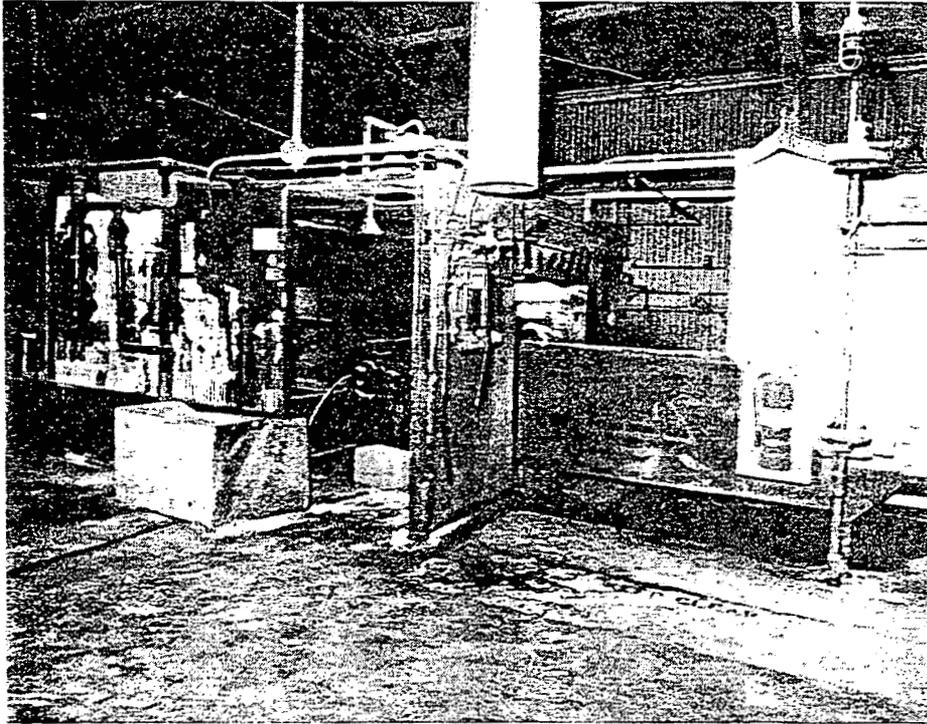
Building 66 - Wheelabrator Platform, West Wall
